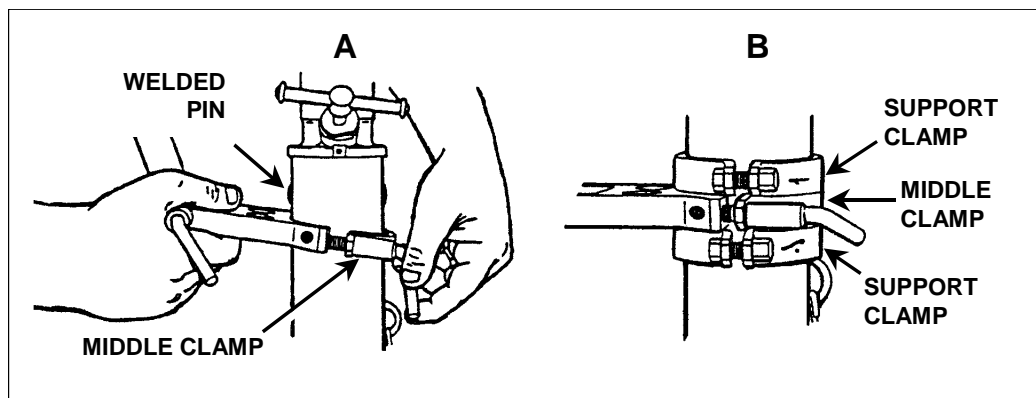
Attachment of clamps to HMMWV armament pedestal carrier.
